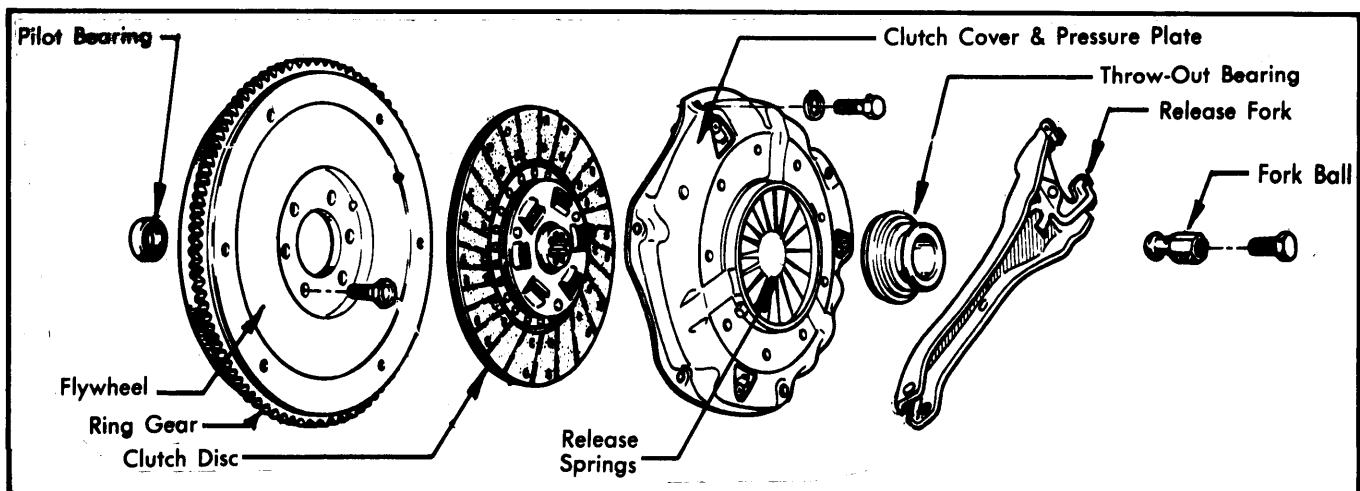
Exploded View of Diaphragm Spring Clutch Assembly
